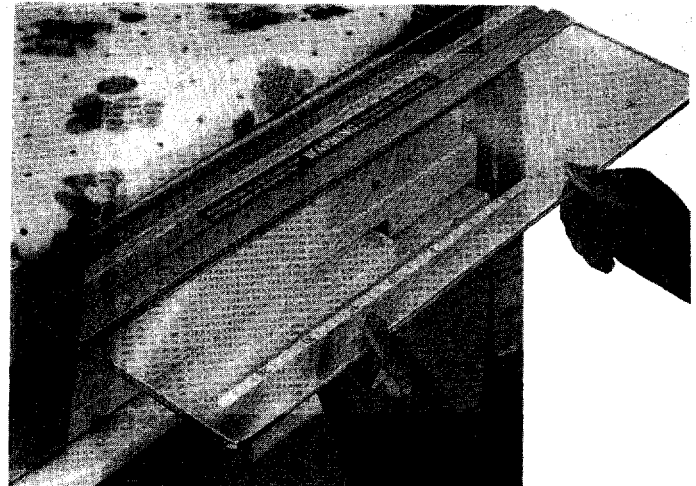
CHECKING THE BASSINET SIDE PANELS
